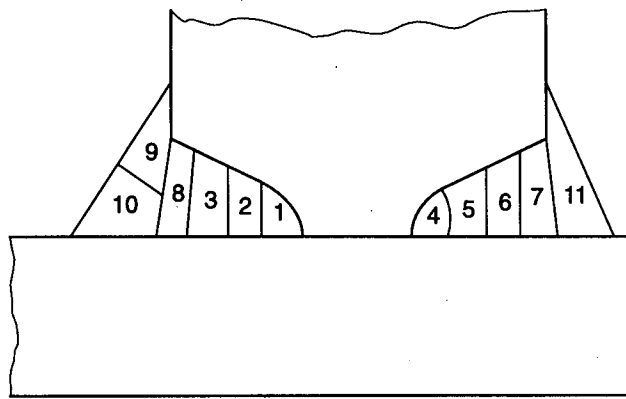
Cross section of double-J eleven pass butt-weld. The numbers show welding sequence used. (From Troive and Jonsson, 1994.)
